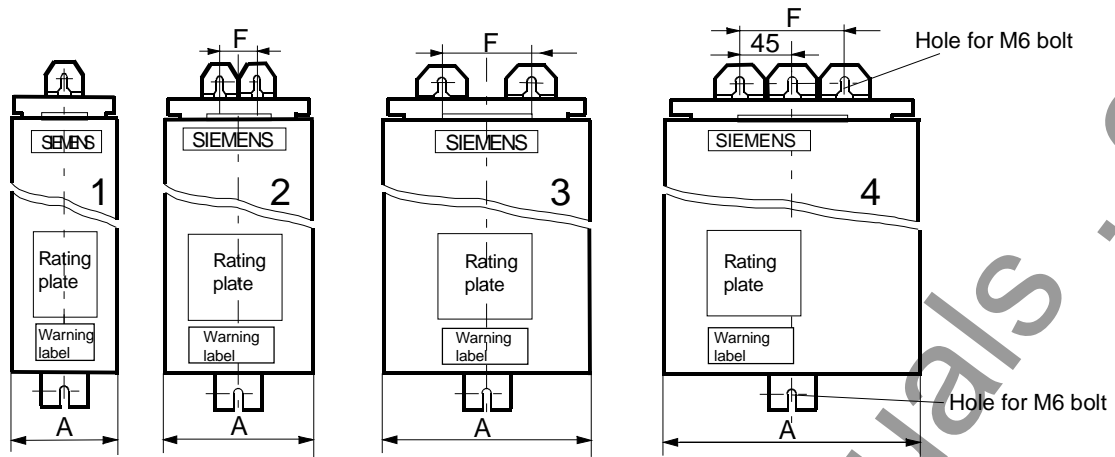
Mounting lugs of sinusoidal filters, size A to D
